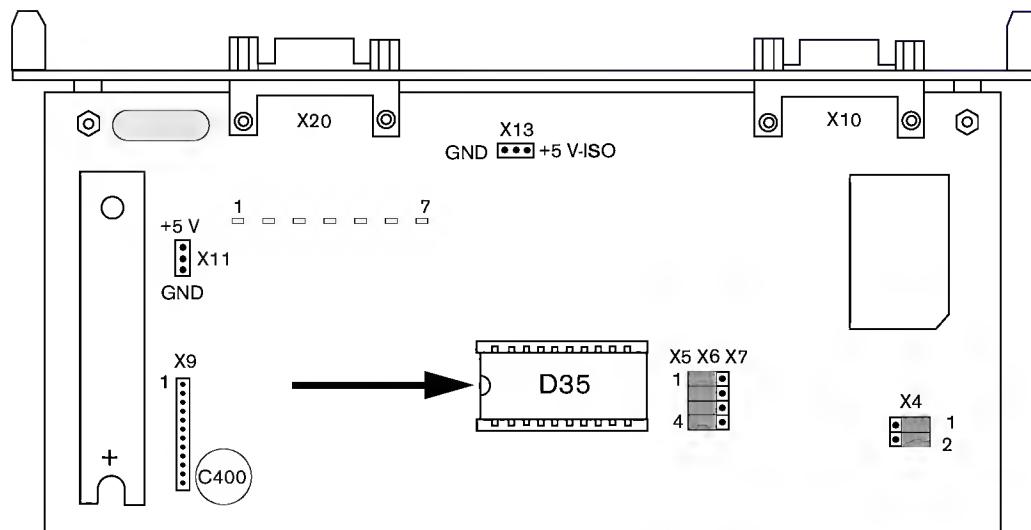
Component mounting diagram CPU PCB (replacing the real-time clock)
